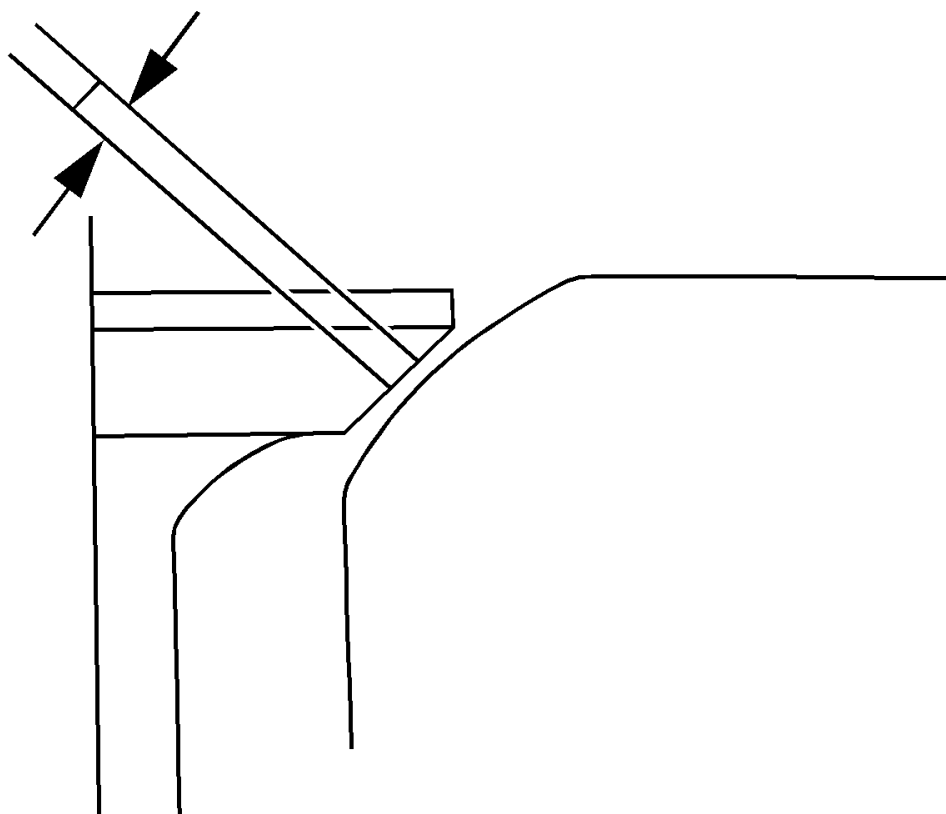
Cleaning Valves, Valve Guides, And Cylinder Head
